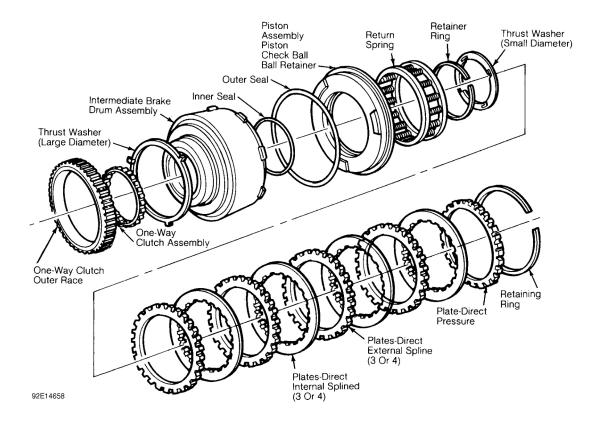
Exploded View Of Intermediate Brake Drum Courtesy of FORD MOTOR CO.
